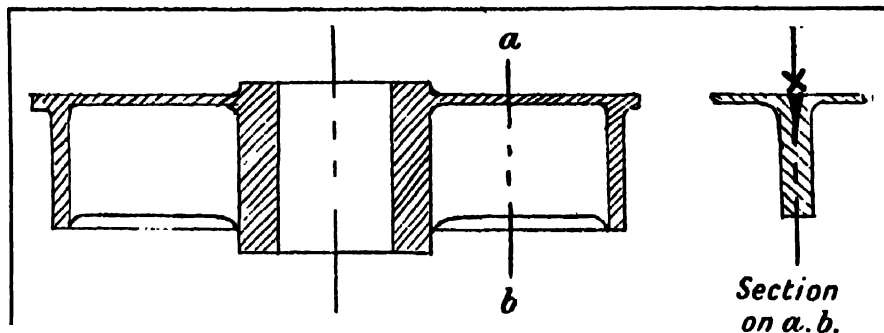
WHEEL HAVING HEAVY RECTANGULAR SECTION WITH A PLATE OF LIGHTER CONSTRUCTION
